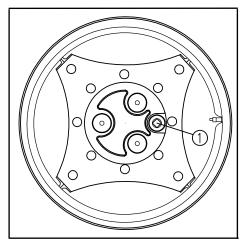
Front axle final drive:1Filter,drain and level plug.
